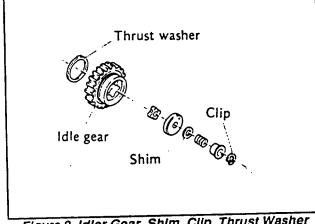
Idler Gear, Shim, Clip, Thrust Washer
